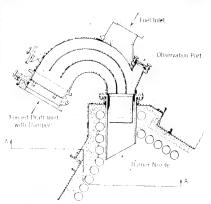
Sectional-plan view of burner for corner firing. (Courtesy Combustion Engineering Company, Inc.)
